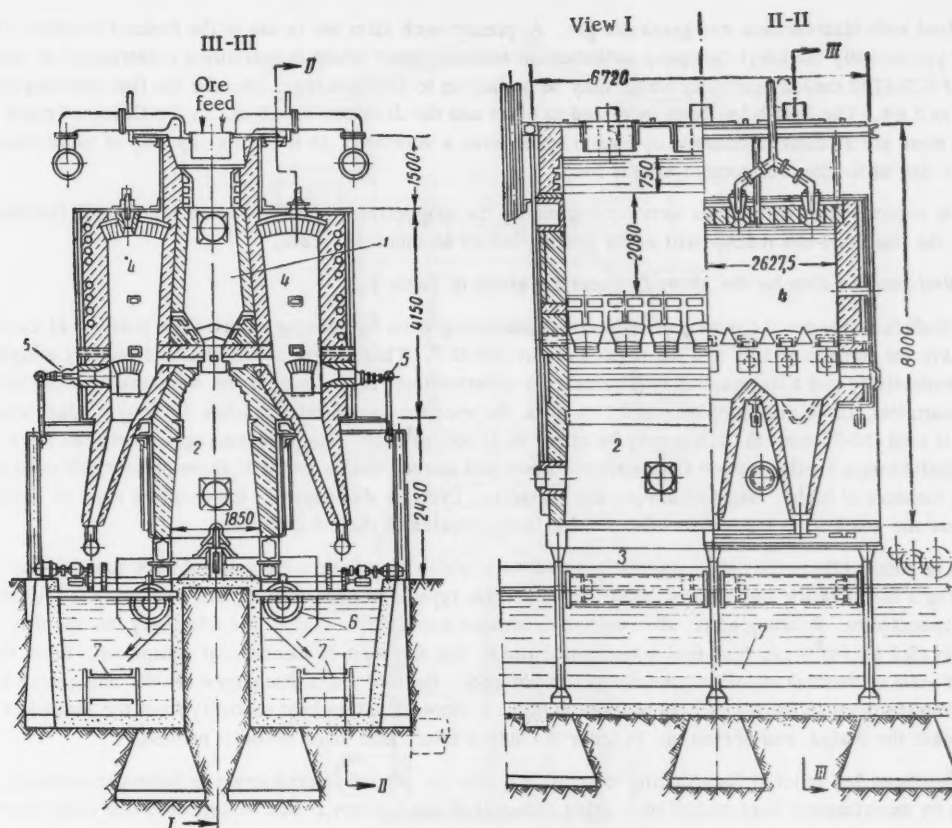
The Anshansk shaft furnace. 1) Ore-preheating zone; 2) reduction zone; 3) cooling zone; 4) combustion chamber; 5) burner; 6) feeder; 7) apron feeder.
